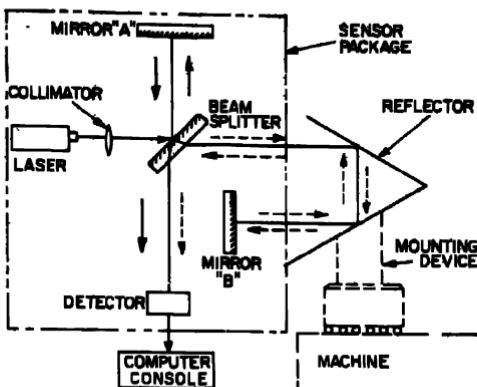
Laser interferometer on a machine tool. (Courtesy of Benwill Publishing Company. From Reference 11.)
